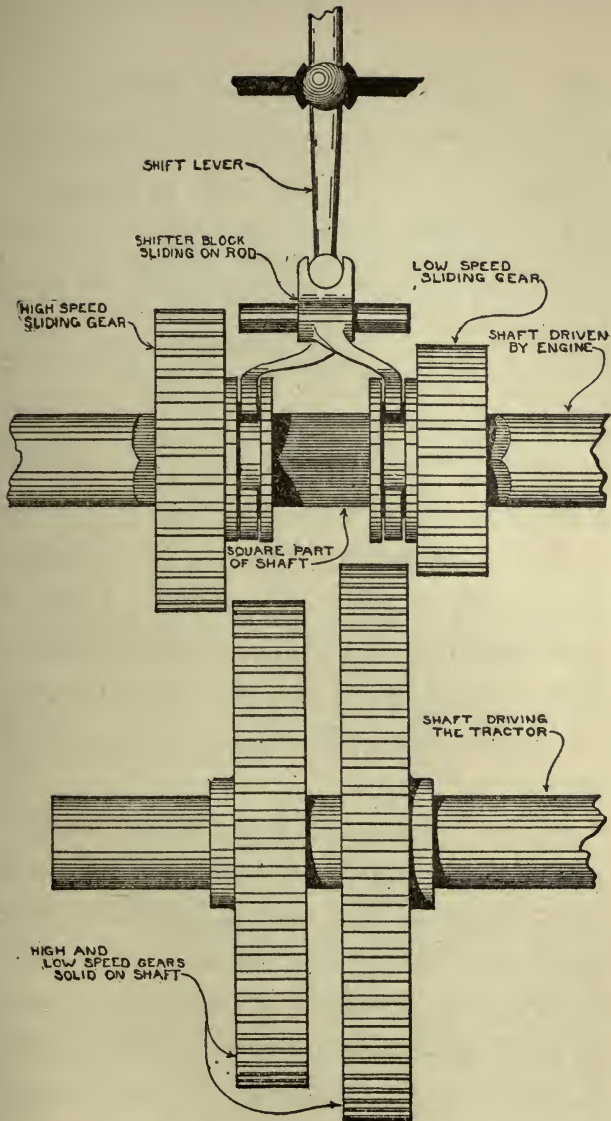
PRINCIPLE OF SLIDING GEAR
